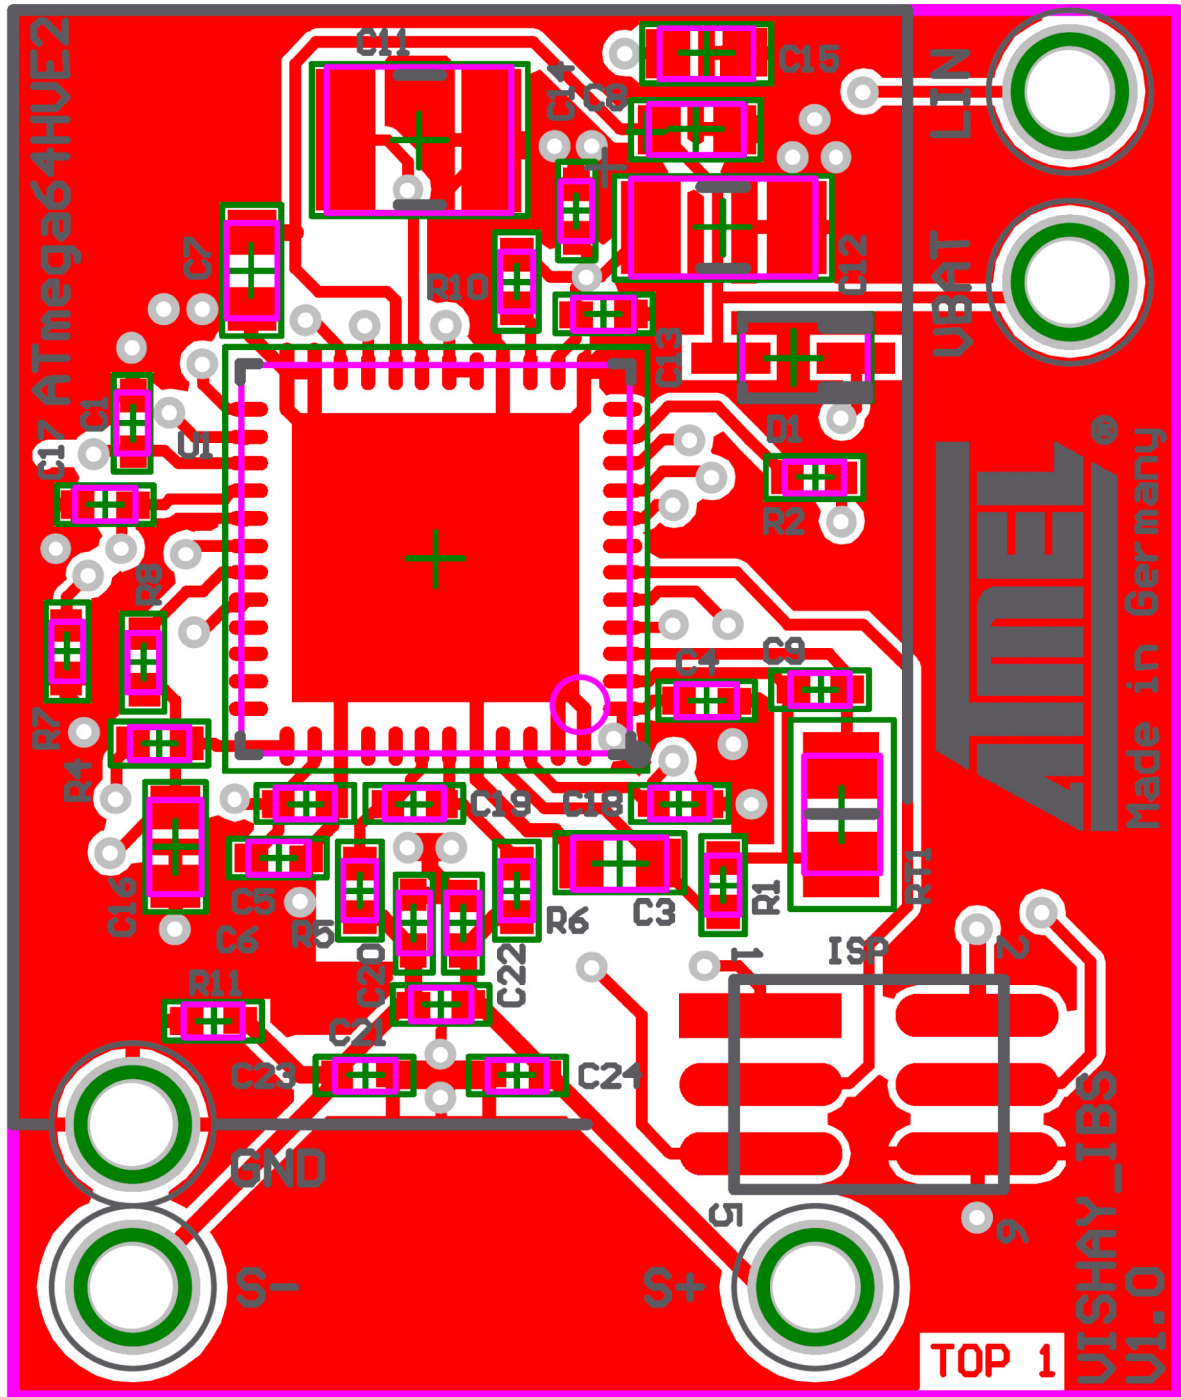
PCB Layout of IBS Module, Mid Layer 1 (View: Top Layer)
